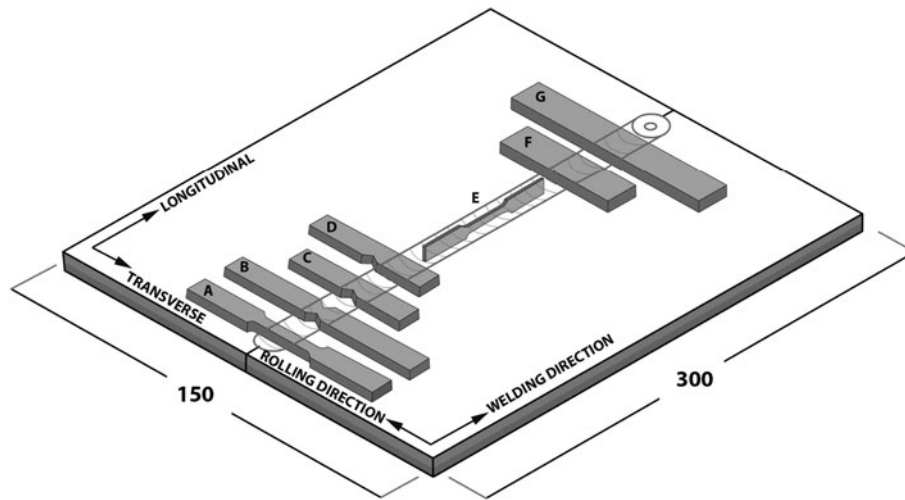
Scheme of extraction of specimens for mechanical testing (A—smooth tensile specimen, B—notched tensile specimen, C and D—impact specimen notch placed at the weld center and HAZ respectively, E—longitudinal flat micro tensile specimen, F and G—metallographic specimen)
